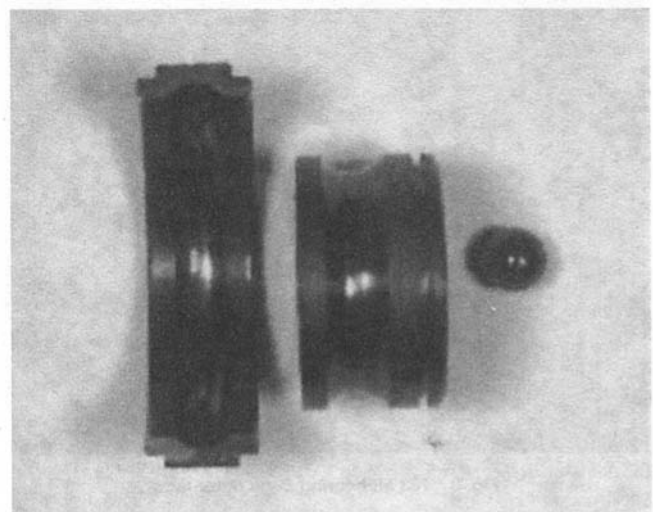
T63 #8 bearing outer race, inner race, and ball
